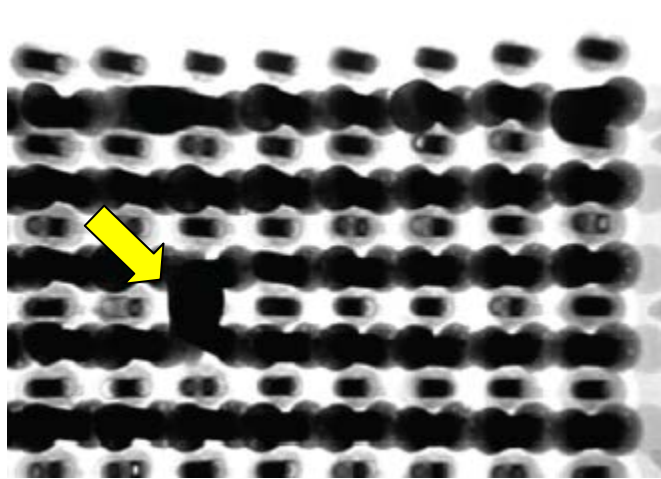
X-radiograph of CGA mounted on PCB showing solder bridge: Reject
